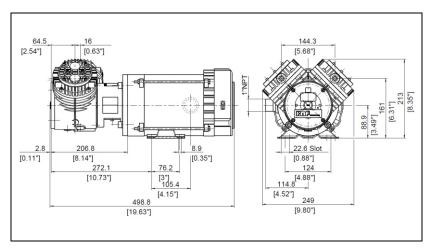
Mounting dimensions UN035._A_I EX & UN035._T_I EX including .9 versions. See head connection diagram. (All dimensional tolerances conform to DIN ISO 2768-1, Tolerance Class V)
